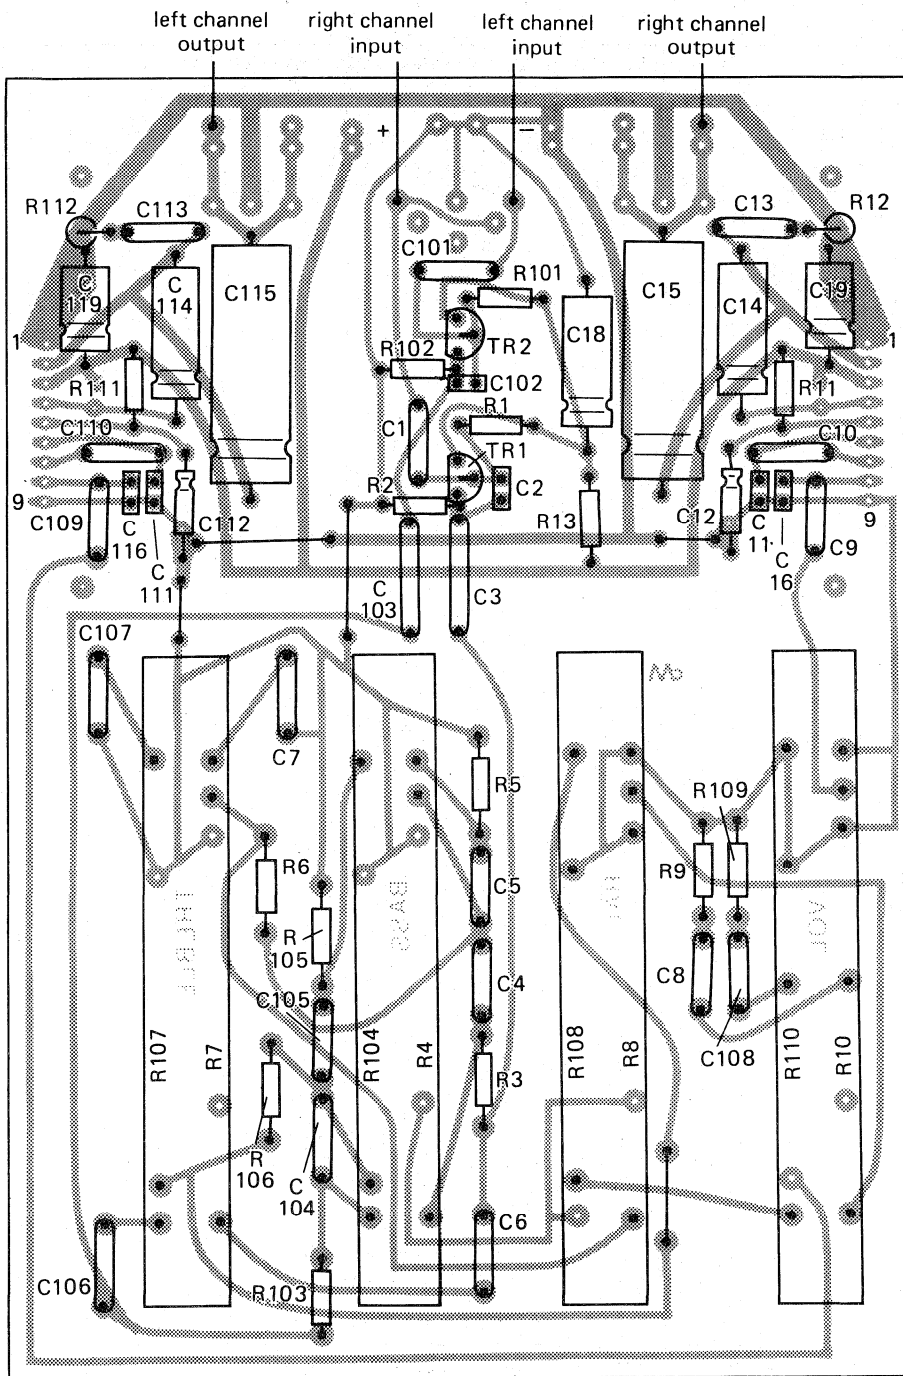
Track side of printed-circuit board used for the circuit of Fig. 17 (Fig. 16 partly); p.c. board dimensions 169 mm x 118 mm.
